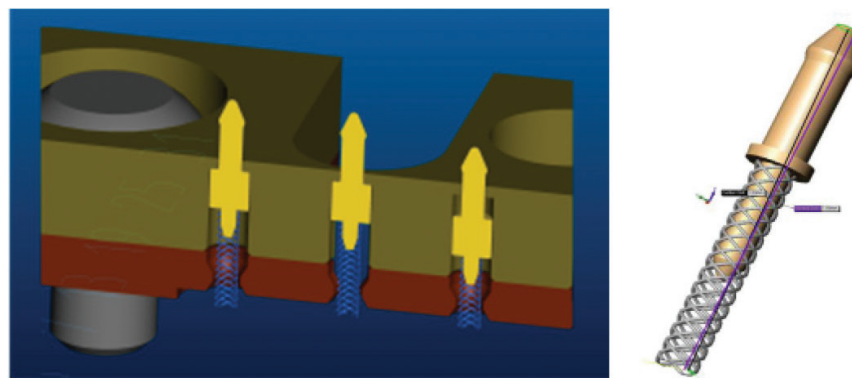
Prototype of new contactor design showing the plunger and the spring sections held in a retaining plate.
